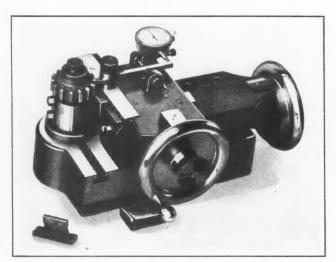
American Gear Tester for Spur, Helical, and Bevel Gears
